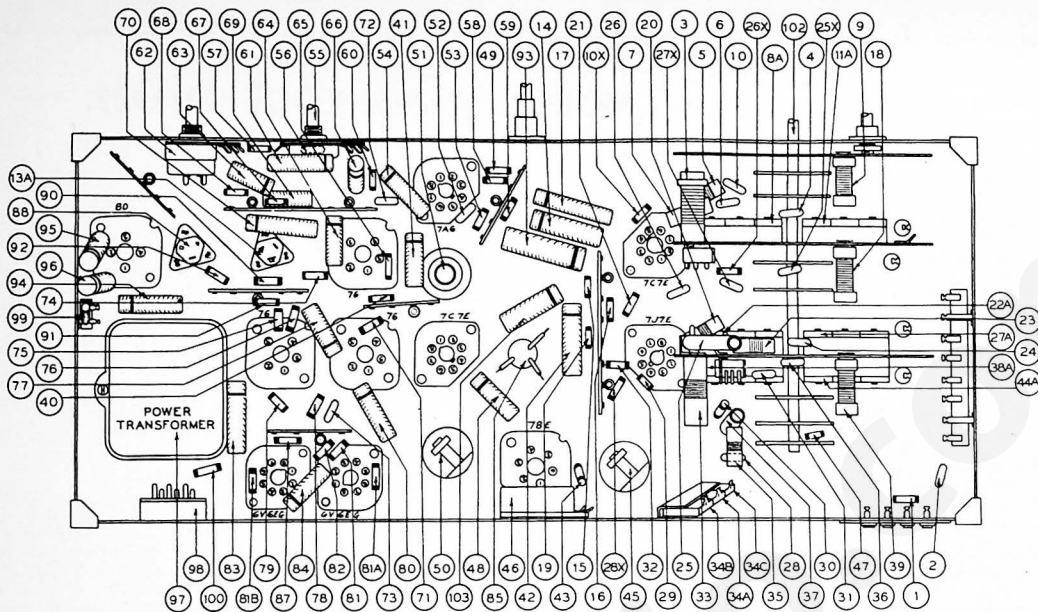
PART LOCATIONS, UNDERSIDE OF CHASSIS
